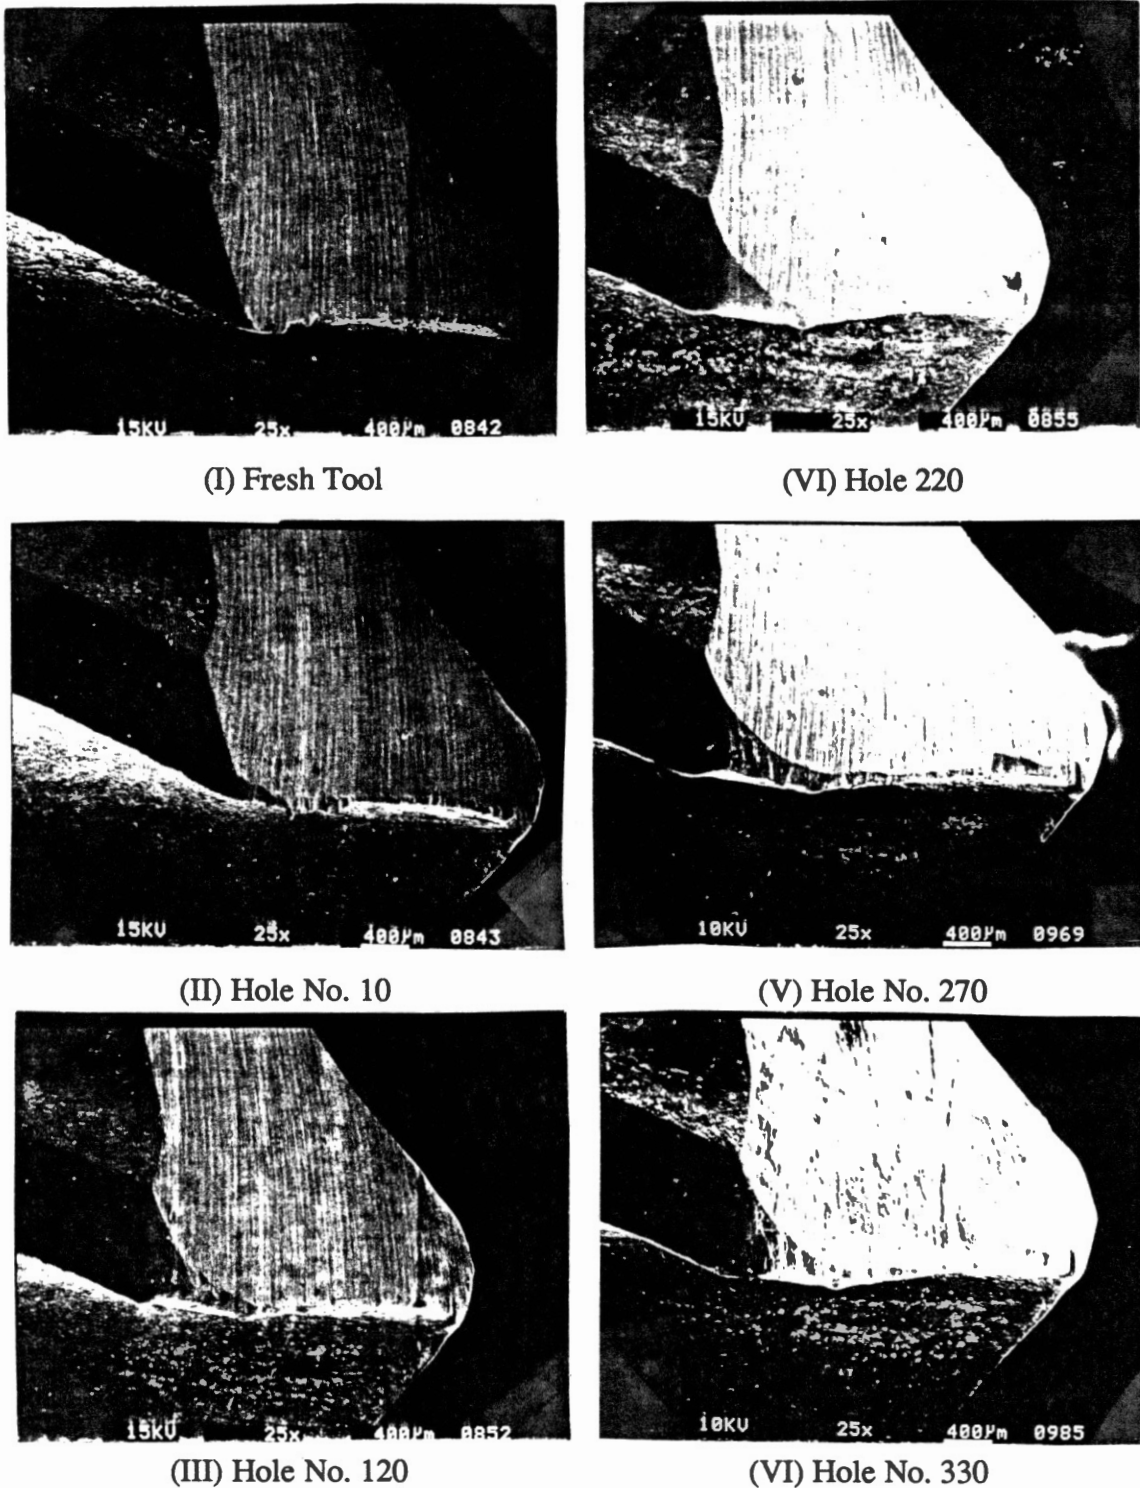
SEM Photograph at Different Stage of Wear for Side B of Drill BL. (I) Side B of Fresh Drill, (II) Side B, After Cutting 10 Holes, (III) After Cutting 120 holes. (IV) After Cutting 220 Holes, (V) After Cutting 270 Holes, (VI) After cutting 330 Holes. Drill bit 3/8 in., For normal cutting: Cutting speed: 50 ft/min (spindle speed: 500 rpm), Feed: 0.005 in./rev (2.5 in./min), Work material AISI 1045 steel (230 BHN). for high speed cutting: Cutting speed: 100 ft/min (spindle speed: 1000 rpm), Feed: 0.005 in./rev (5 in./min). Work material AISI 4150 steel (330 BHN).
